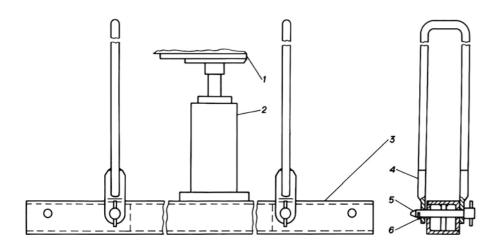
Spring installation tool: 1 - spring; 2 - jack; 3 - beam; 4 - U-bolt; 5 - pin; 6 - latch
